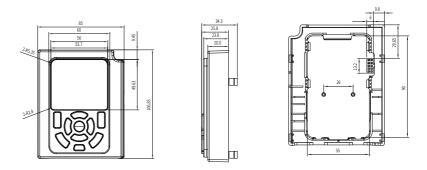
Outline and installation dimensions of LED operating panel for T5 to T12 models (mm)
